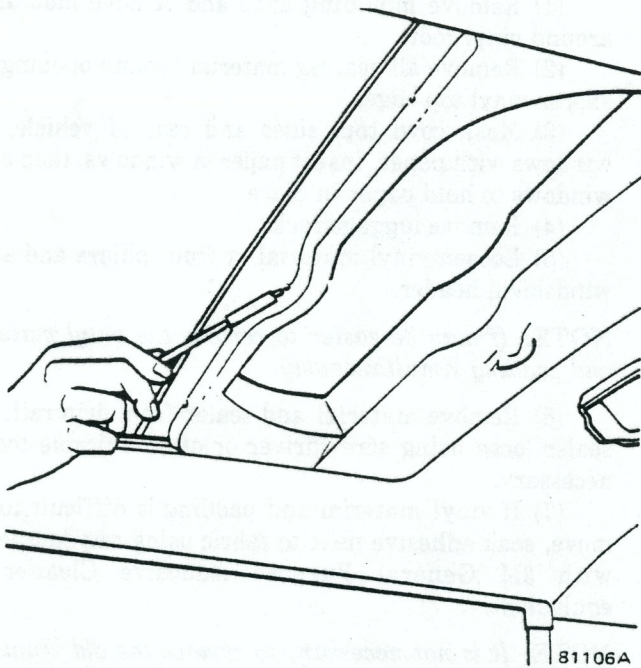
L-11 Removing/Installing Halo Assembly Attaching Screws
